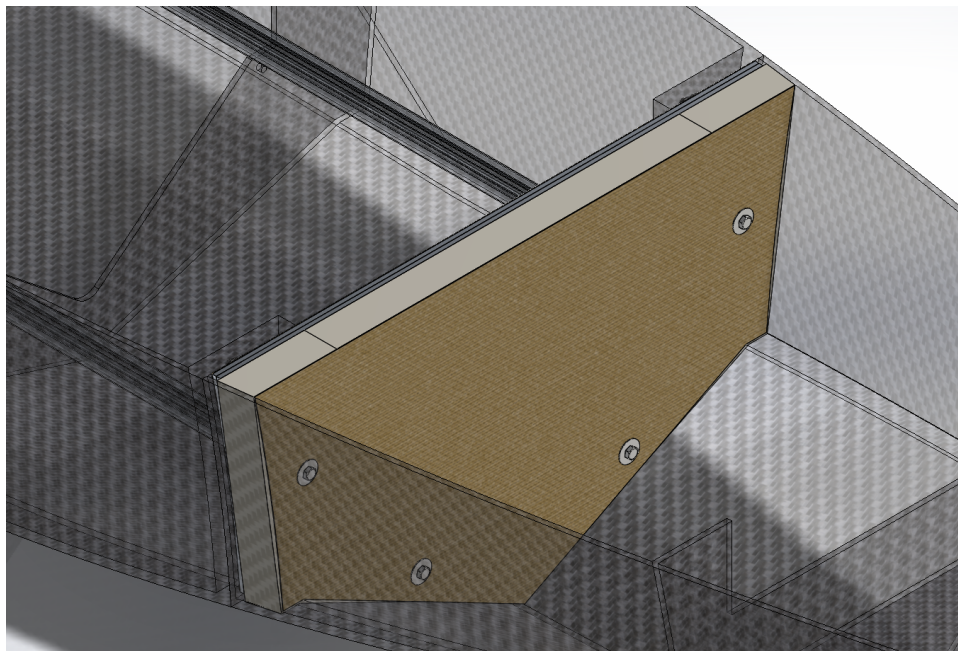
New bulkhead in Solidworks that will be attached to the bow section.
